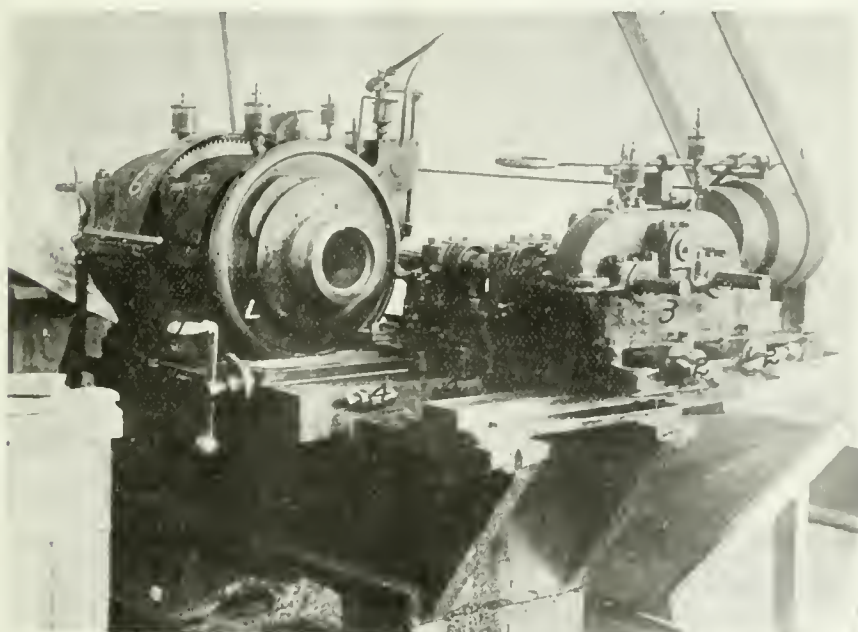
SPECIAL THREAD MILLING MACHINE—FRONT VIEW
